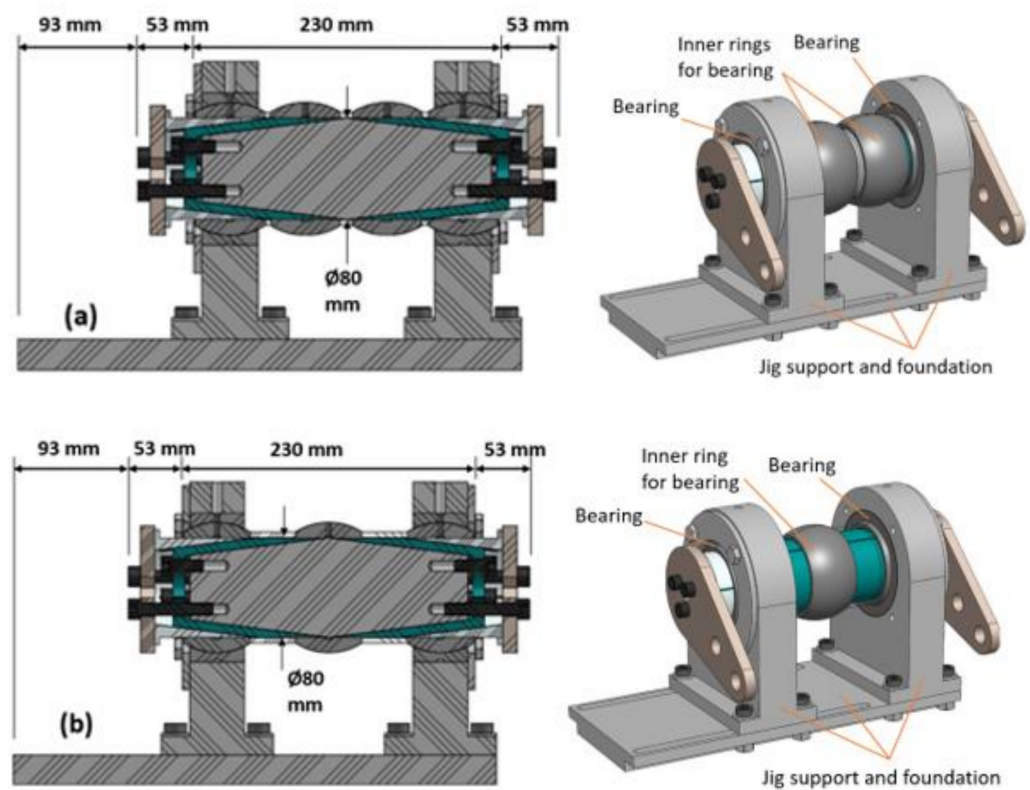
Test setup for Test 1: (a) Test 1a—cross sectional view (left) and isometric view with part names (right); (b) Test 1b—cross sectional view (left) and isometric view with part names (right).
